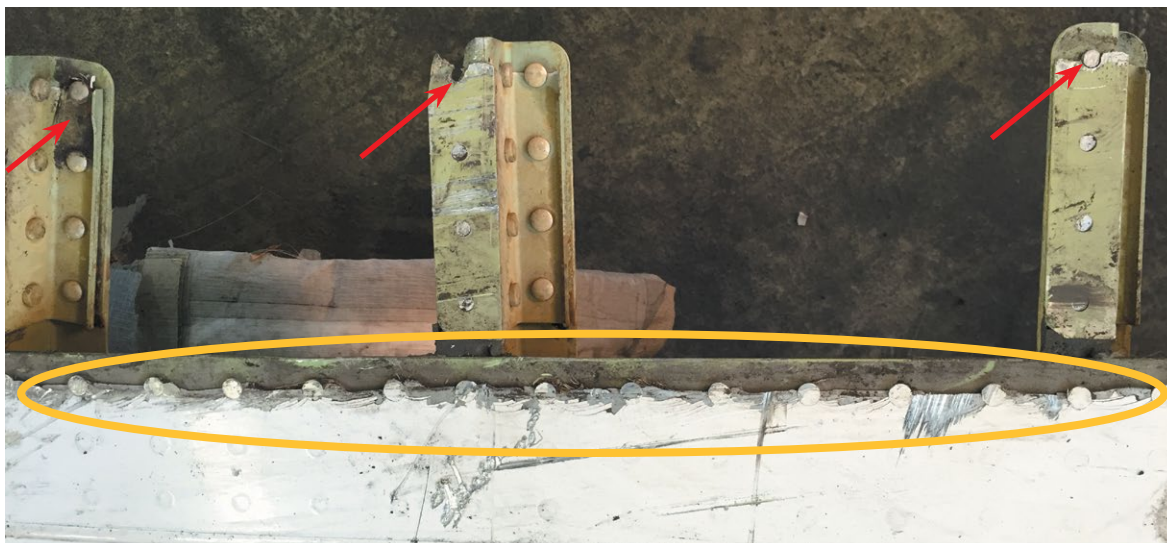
Typical case of net section failure, straight cracks in net section, paint cracks aligned with skin crack, stiffener failure perpendicular to its axis, at first fastener. (Source: Dutch Safety Board)
